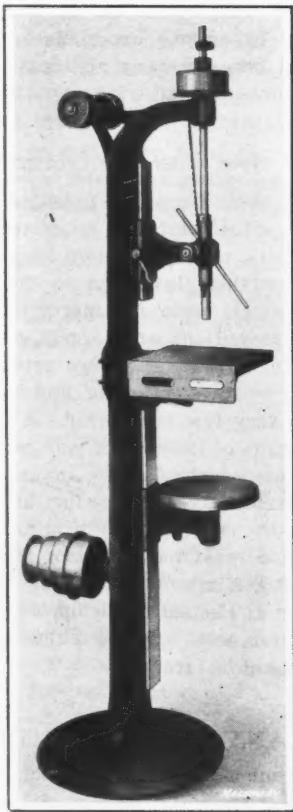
Sensitive Drilling Machine with Old Type of Spindle
